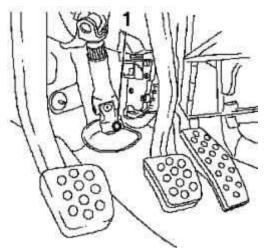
Bolt fixing the steering column: 1 - Bolt
